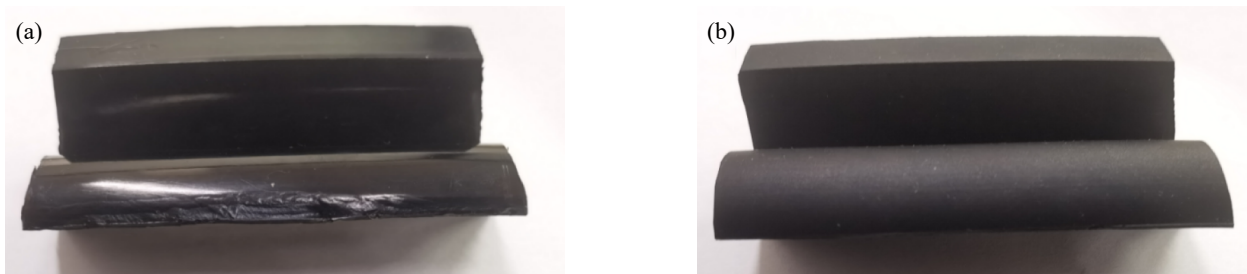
Partial drawing of VD type NBR seal for shield tunneling machine: (a) 1# NBR; (b) 4# NBR
